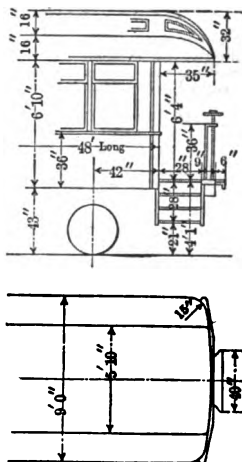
Elevation and plan, car No. 5 (General Electric tests).
